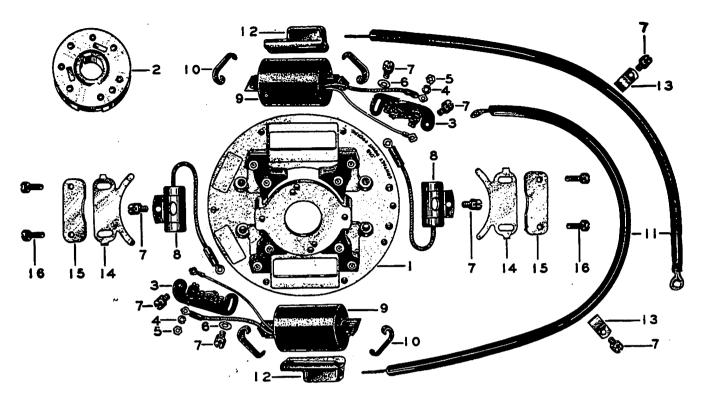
Scintilla (Type K2A-5) Magneto Parts
